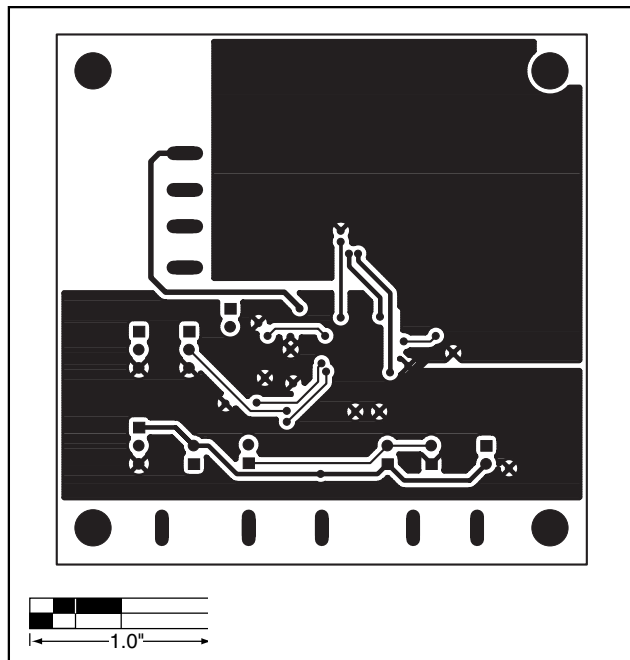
MAX1844 EV Kit PC Board Layout—Solder Side
